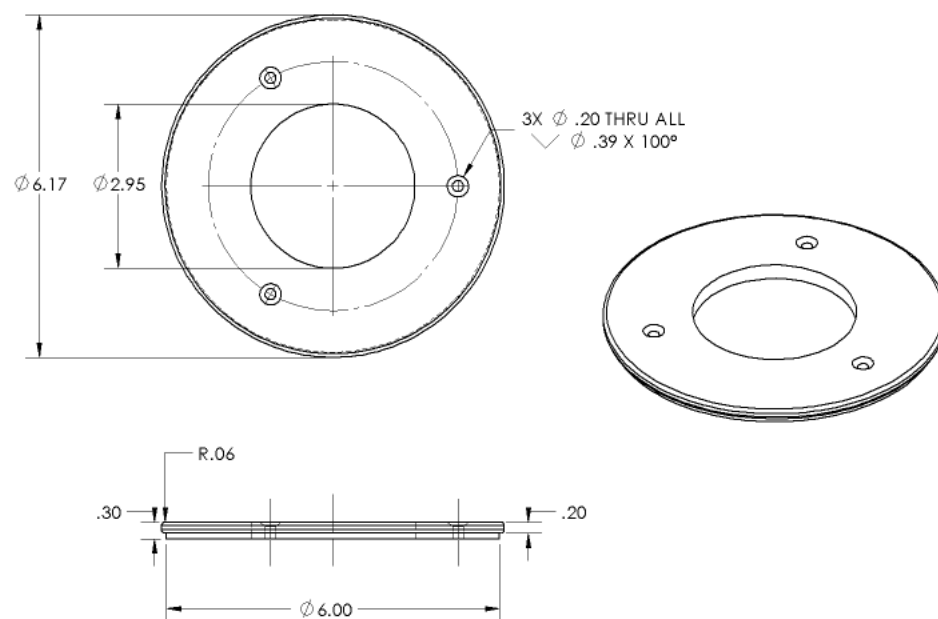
Dimensional Drawing of Aluminum Thrust Plate
